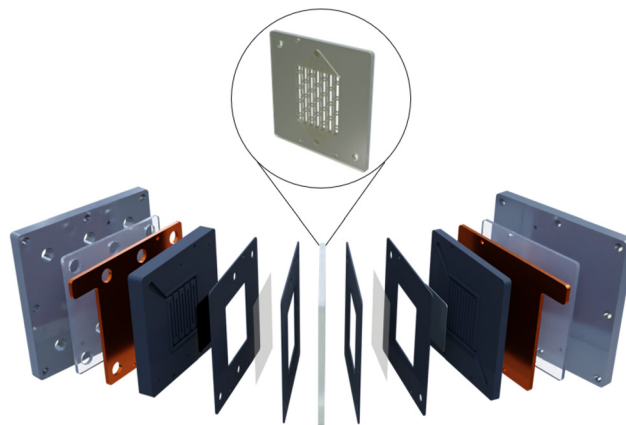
Exploded view of the in-house manufactured and engineered EHL reactor highlighting the 3D printed middle compartment. The components which make up the reactor are from left to right: endplate; insulating plate; current collector; anodic bipolar plate; carbon GDE; gasket; PEM; gasket; 3D printed middle compartment with supporting structure for the membranes; gasket; NaEM; gasket; Pt gauze; cathodic bipolar plate; current collector; insulating plate; endplate.
